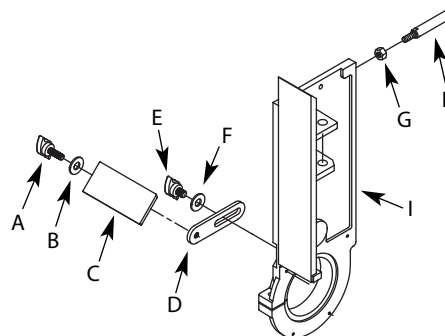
Belt Tool Rest and Stop Bar Assembly
